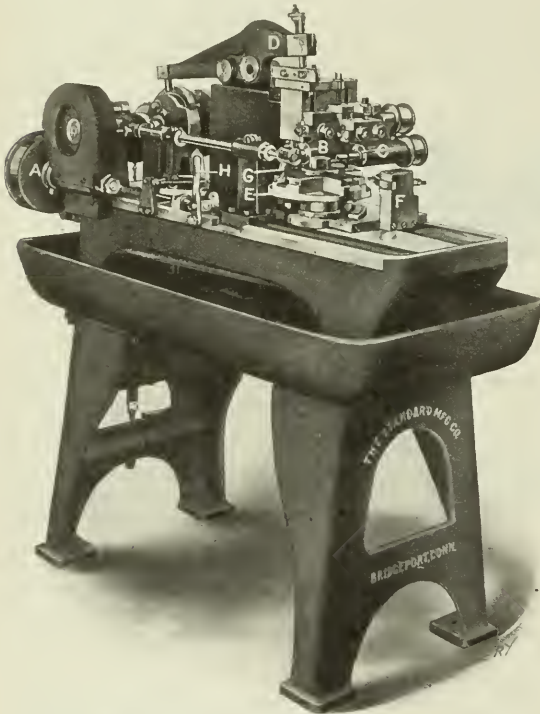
Special Machine designed by Standard Mfg. Co. for milling Fuse Bases
